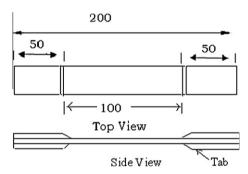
Sketch of lamina specimens with tab (all dimension in mm).
